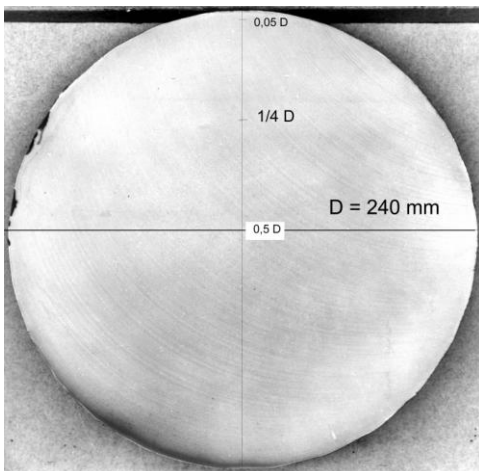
Macro-structure of the steel X160CrMoV 12 1 (EN 96 79) after forging on the press CKW 1600: K = 3.5 (ingot K21, bar diameter 240 mm)
